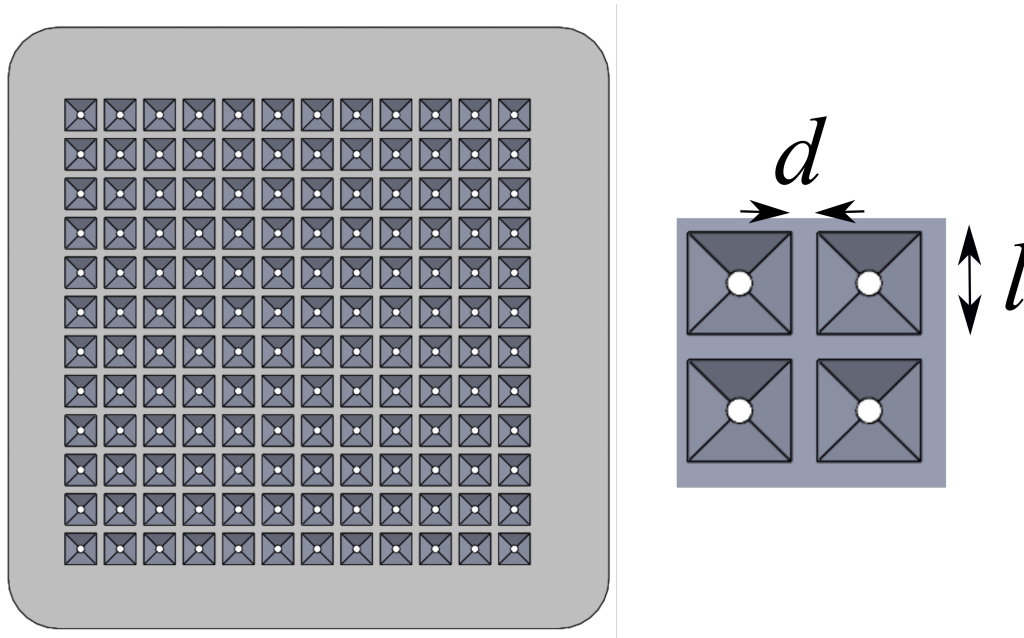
Schematic of dimple surface showing the dimensions of dimple array
